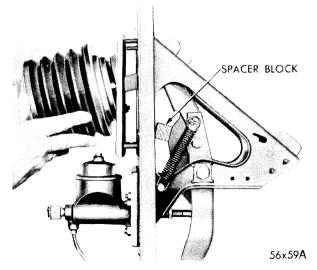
Removing or Installing Power Brake Unit (Bellows Type Shown)
